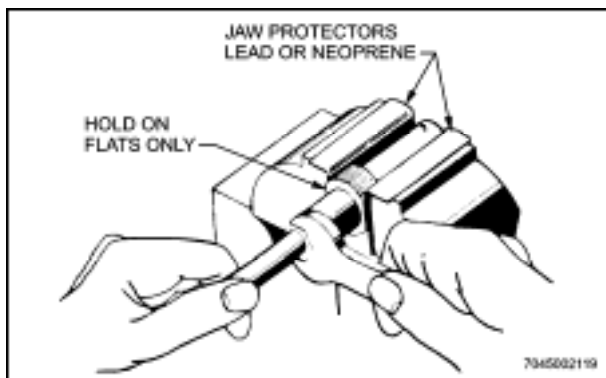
Tightening Braid Clamp Nut into Plug or Jack Body
